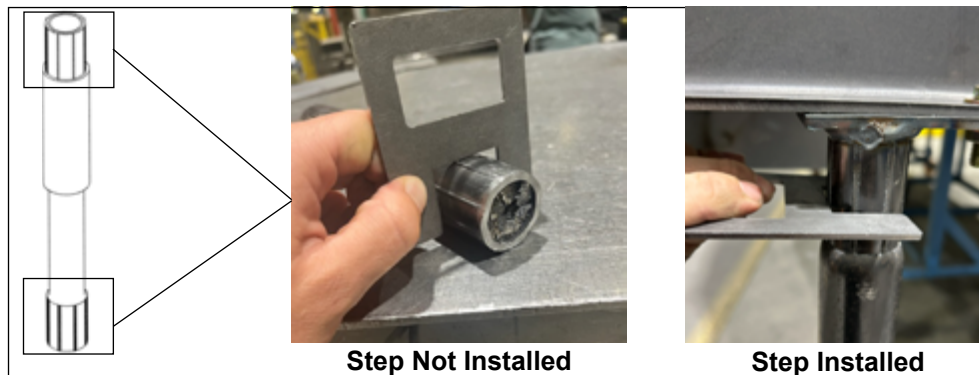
Measuring the Crimp Diameter with Gauge Tool
